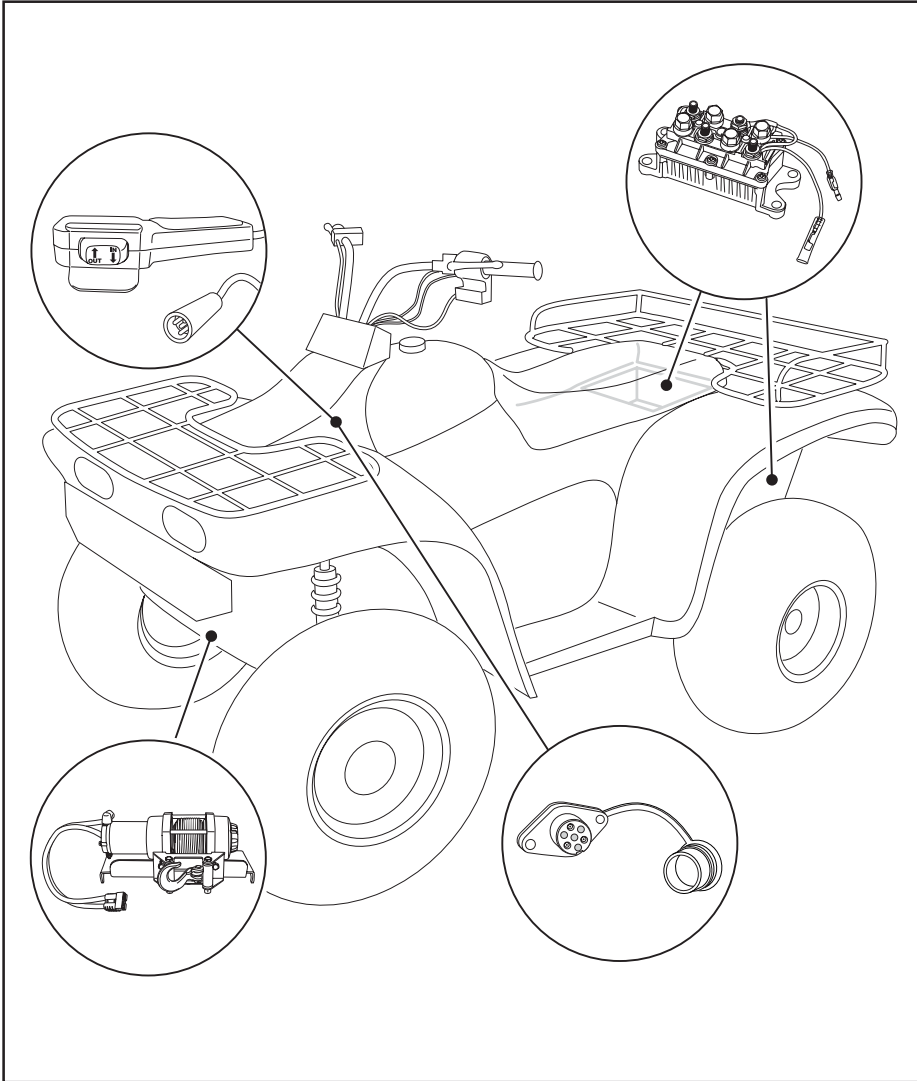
To install the complete kit, you will need to mount the winch, contactor, and remote socket. Mounting locations may vary depending on make and model of the ATV. Read and understand the following instructions to choose the appropriate mounting locations.
